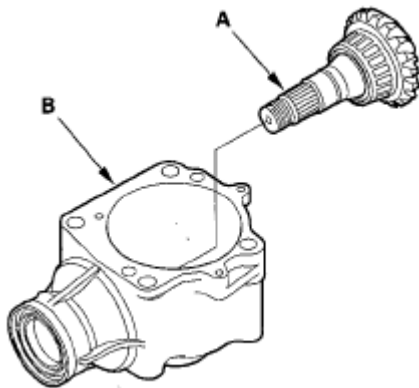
Identifying Transfer Output Shaft In Transfer Housing
